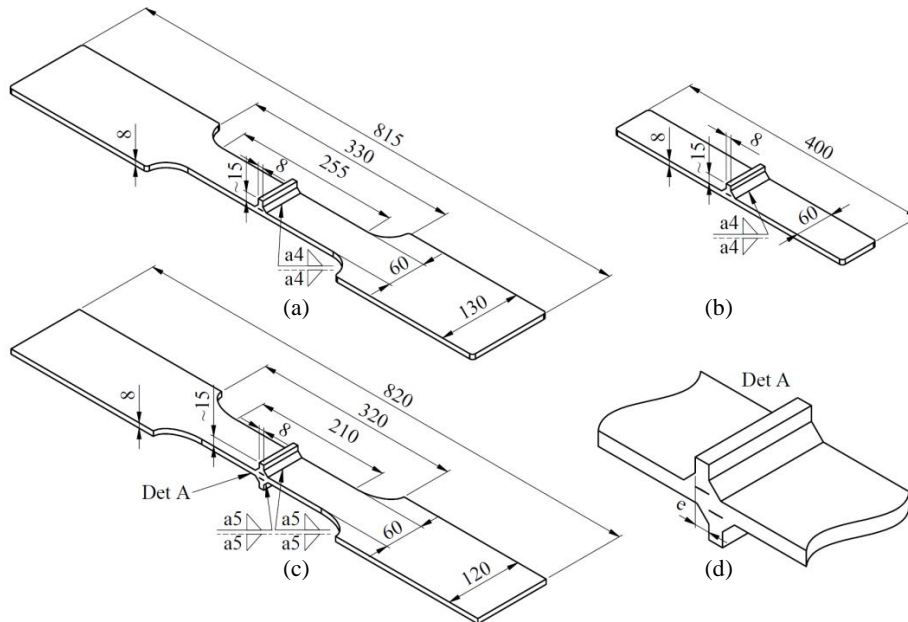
Shape and dimensions (in mm) of S1100QL specimens. NLCT joints subjected to (a) axial loads and (b) bending loads, (c) NLCX joints and (d) a detailed view of NLCX joints with plate misalignment.
